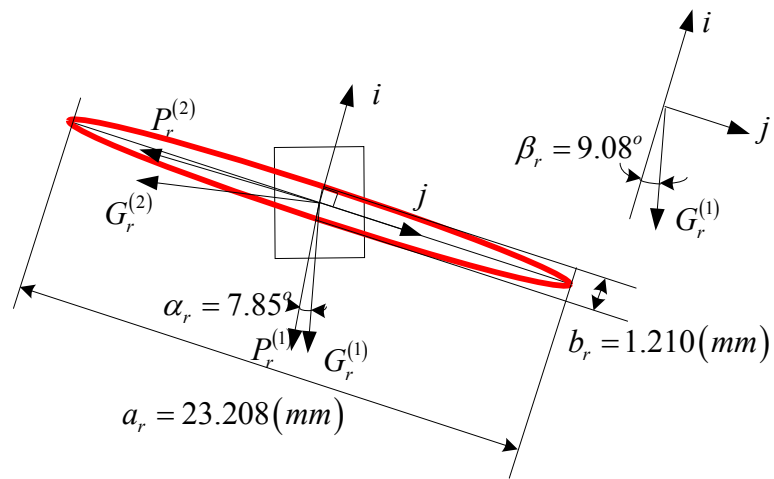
Contact ellipse of the genuine spiral bevel gears.
